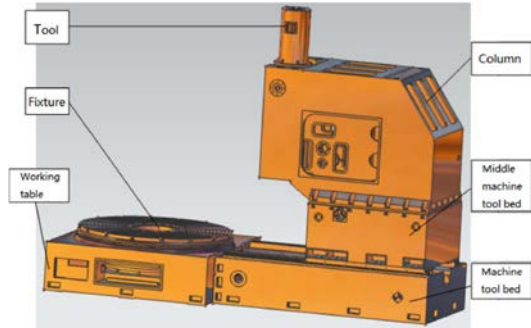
Physical model of "Machine-Tool-Workpiece" system of gear shaping
